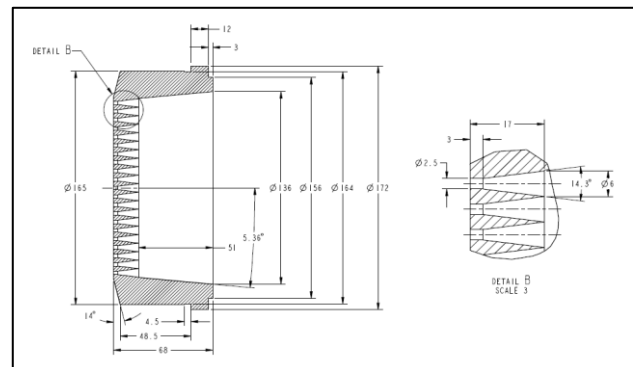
(b): Breaker plate with tapered holes 2D Drawing
